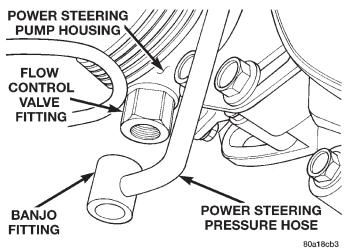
Power Steering Pump Pressure Fitting With Variable Assist Power Steering
